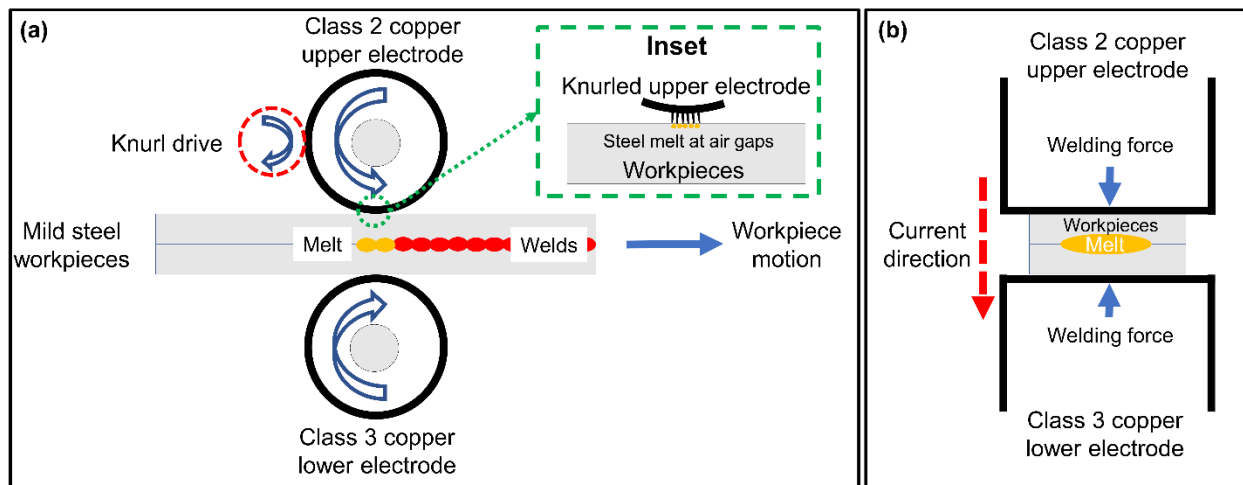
Schematic shows (a) side-view and (b) end-on view of the mash seam welding setup. Inset in (a) shows a magnified view of electrode-workpiece surface contact. None of the drawings are to scale.
